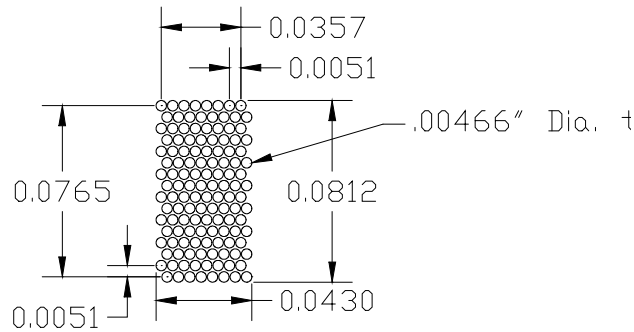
Special collimator configuration. Collimator holes of 0.1 mm diameter are spaced 0.13 mm apart in a hexagonal array. Dimensions in the drawing are in inches, since it was a production drawing.
